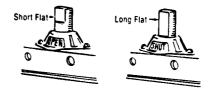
PINION ASSEMBLY ORIENTATION.
